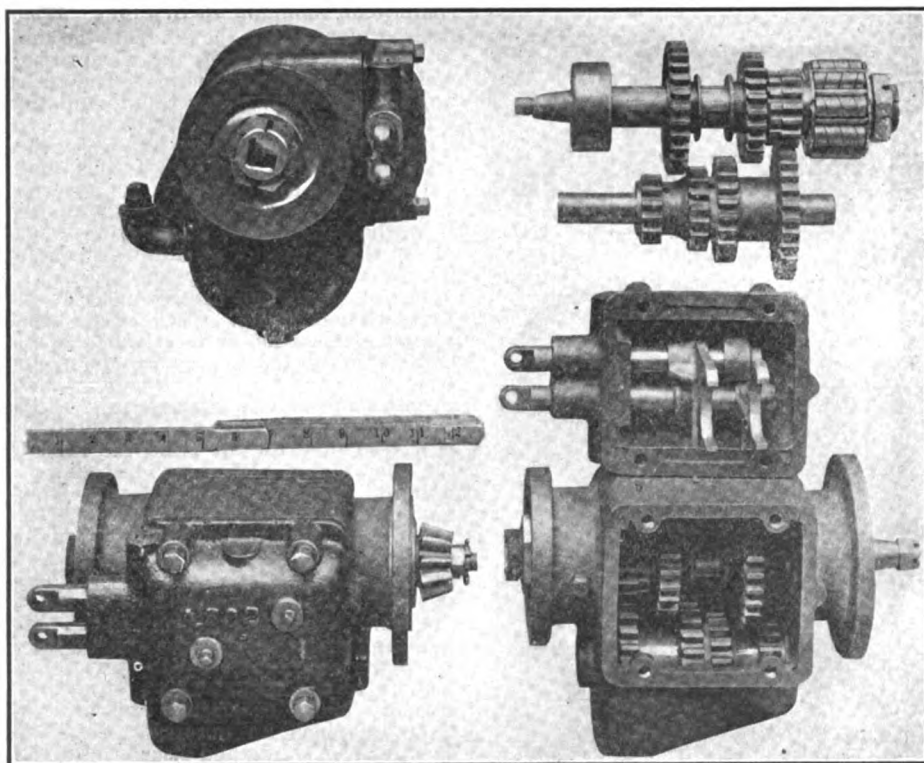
Northern small car gearset. This model is for attachment to the rear axle. Another type is made for unit power plant constructions
